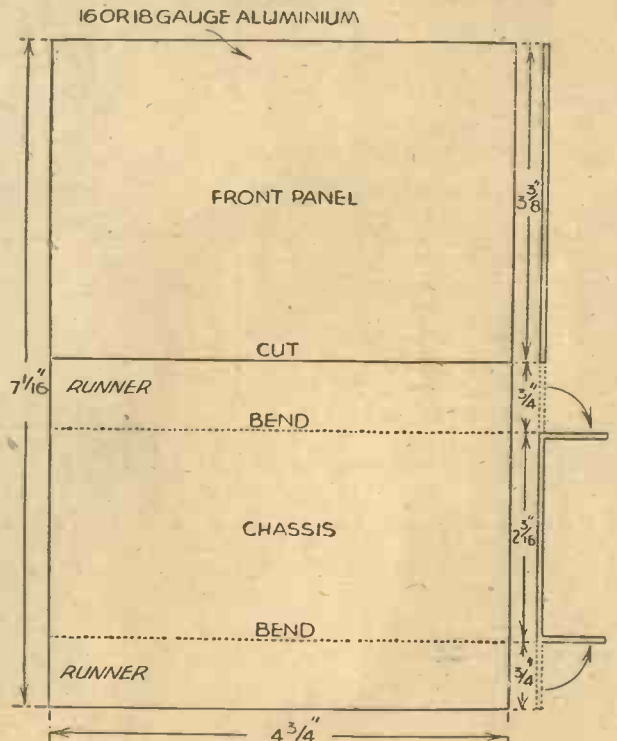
Cutting and drilling dimensions for the metal chassis.
